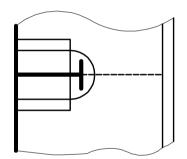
End connection of ordinary stiffener Two large collar plates
